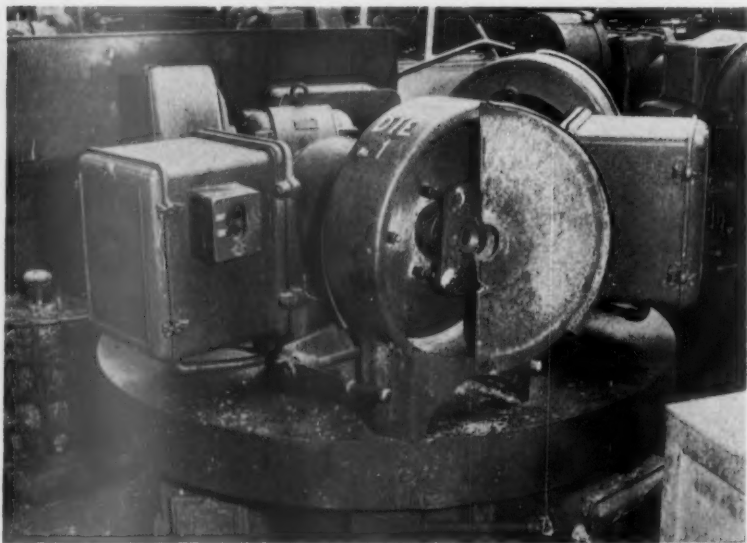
Centrifugal die casting machines for babbiting the big end bore
